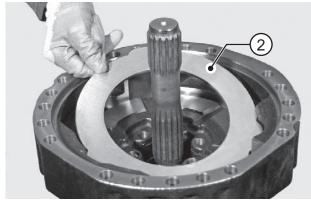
Remove braking discs (2, 3), noting down direction of assembly.
